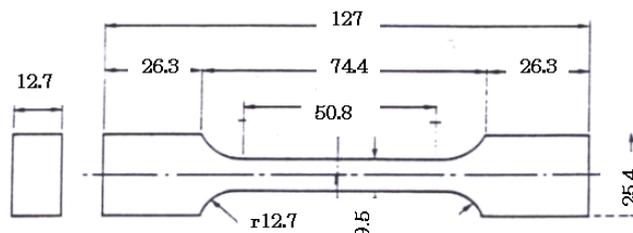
Uniaxial tensile JANNAF testing specimen. (all dimensions: mm)
